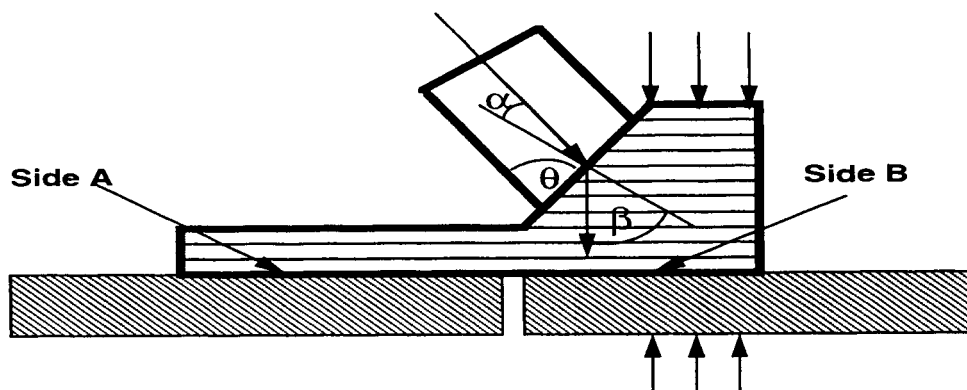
Assembly of adhesive bond specimen and the fixture for mode conversion.
